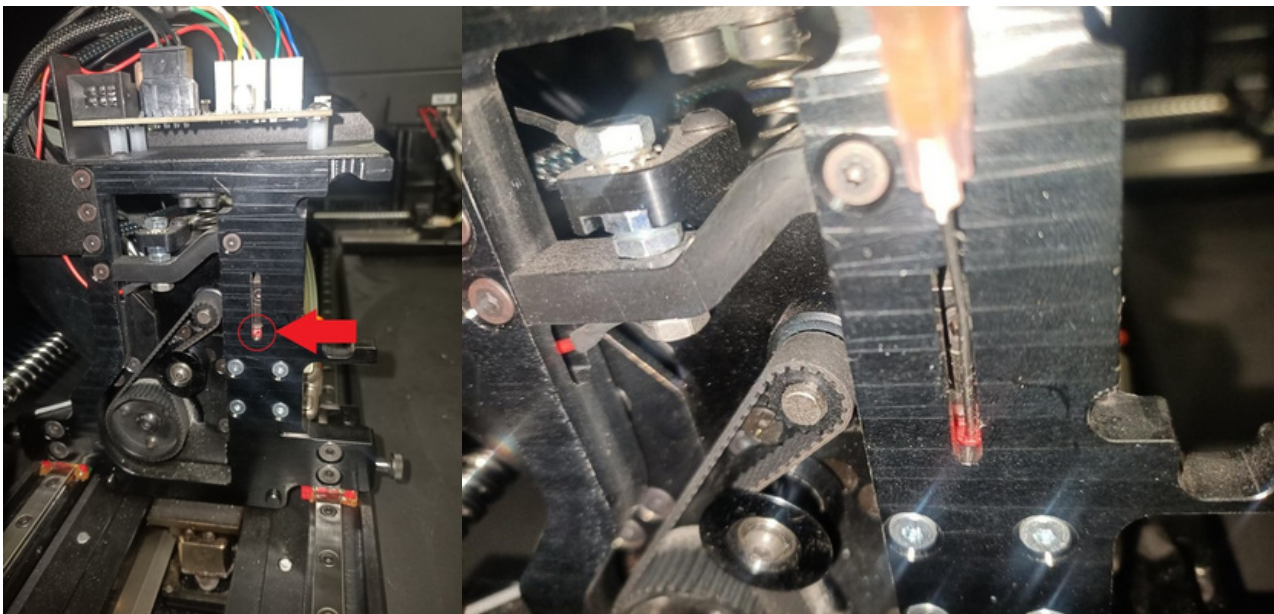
Extruder carriages and their lubrication ports. Figure 18 Extruder carriages lubrication
